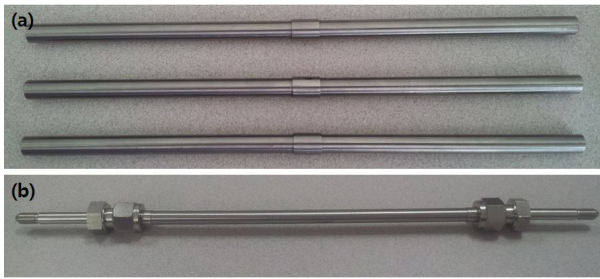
(a) FMS butt weld tubes (b) Hoop stress test specimen.
